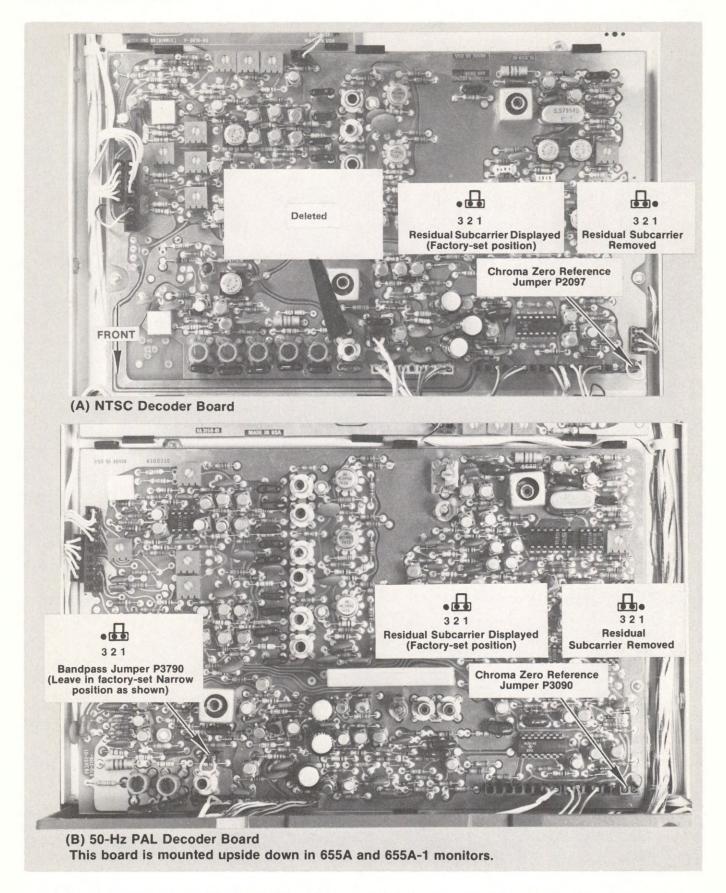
Right side view showing locations of the Decoder circuit board jumpers. Right frame section was removed to provide a clear view.
